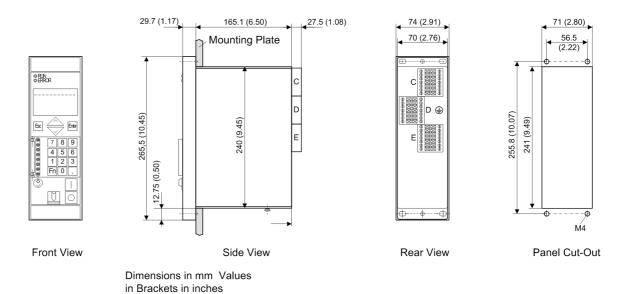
Dimensional drawing of a 7RW80 for Panel Fush and Cubicle Mounting (Housing Size <sup>1</sup>/<sub>6</sub>)
